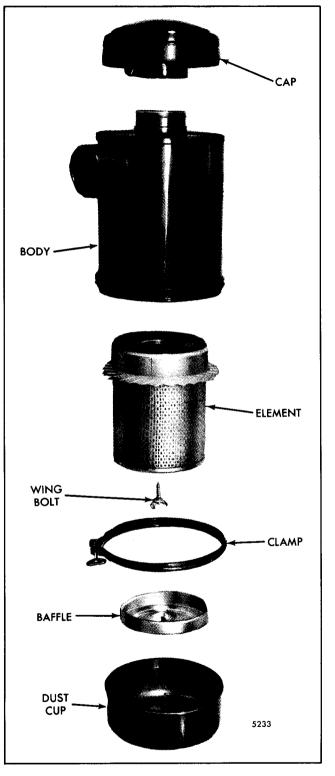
Dry Type Air Cleaner (Heavy Duty)
